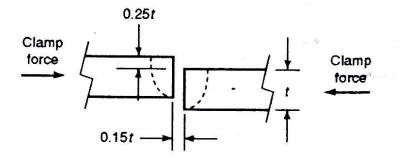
Tolerance of the butt welding of material of thickness t. (Schwartz, 1979).
